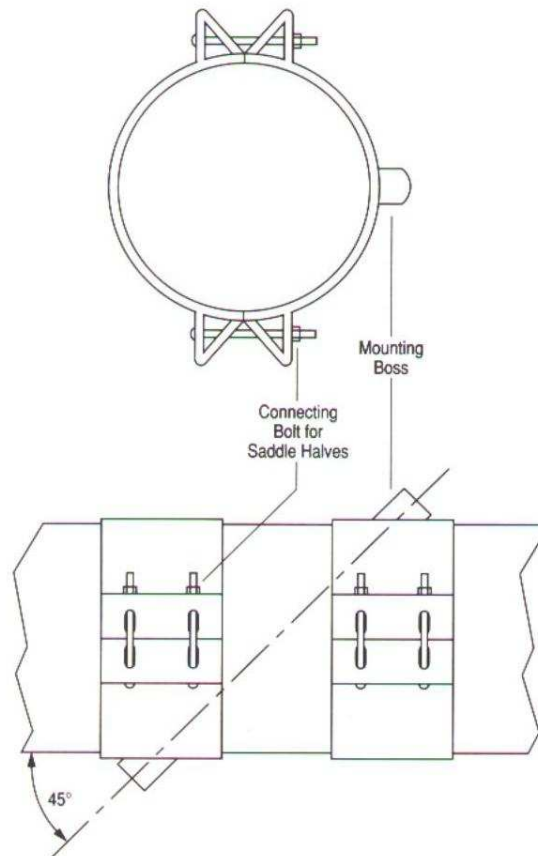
SADDLE ASSEMBLIES FOR TRANSDUCER INSTALLATION
